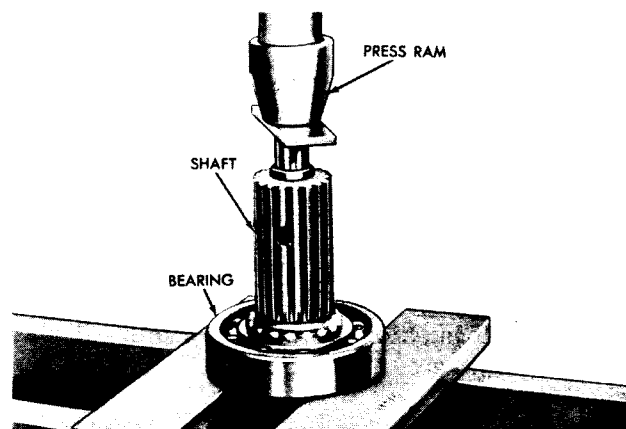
Installing output shaft into ball bearing^{S3055}
